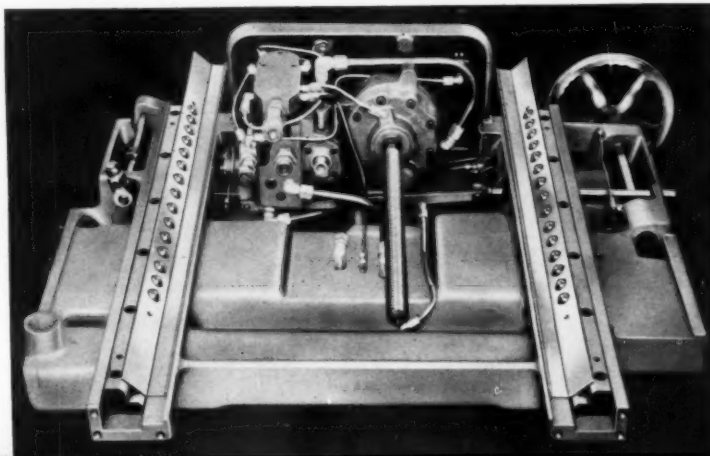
(Above) Hydrabrasive precision surface grinder announced by Abrasive Machine Tool Co.
